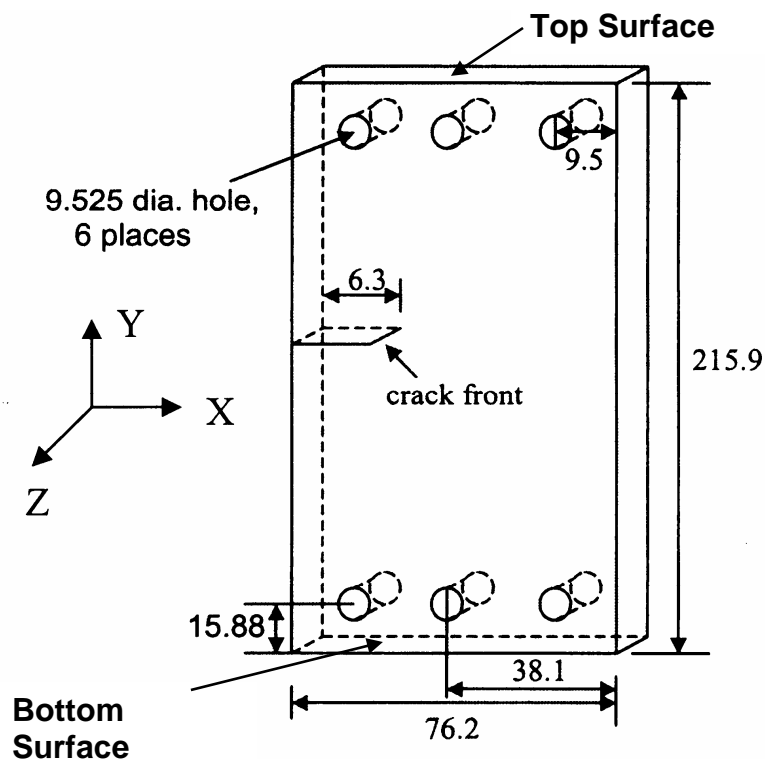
Combined tension-torsion test specimen geometry (all dimensions in mm)
